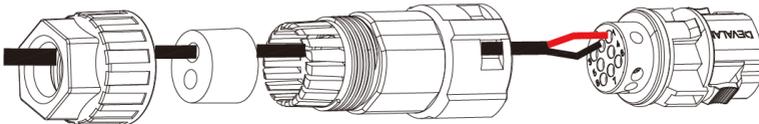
Connect RS485 and/or CAN cable to their terminal
